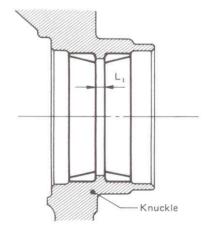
Measuring the distance between the two inner faces of the bearings (Sec 5)
